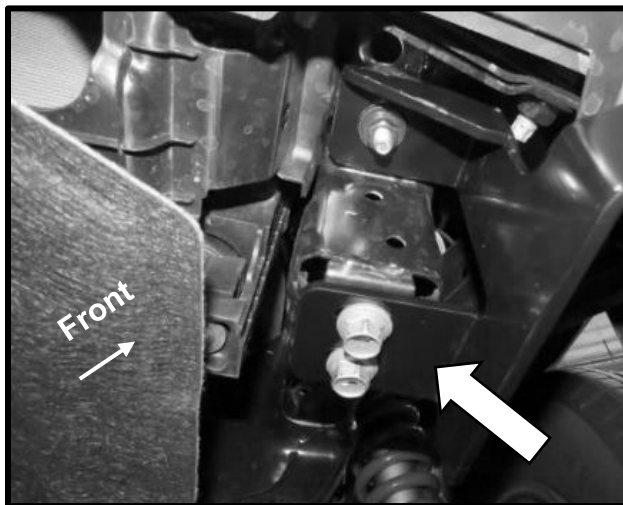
On both sides, remove the two bolts located the arrow. Set them aside, they will be reused.
